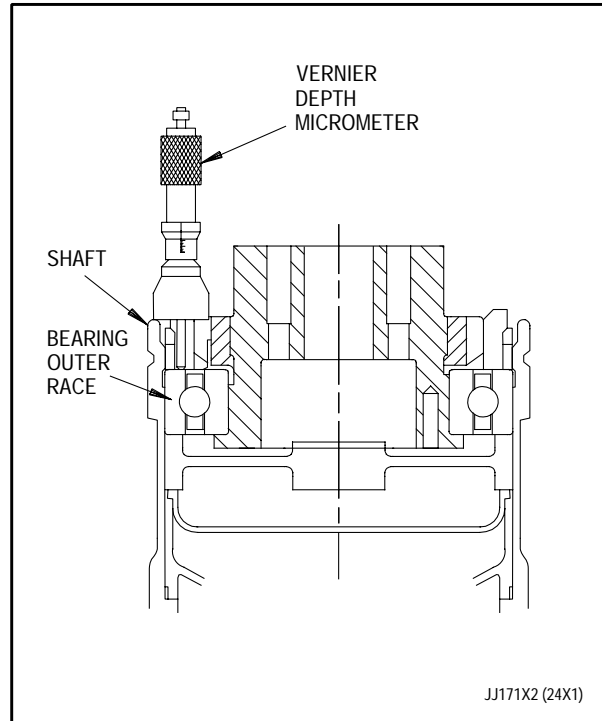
Front Compressor Drive Turbine Rotor and Stator - Installation into PWA 56338 Stand (Sheet 3 of 9)
